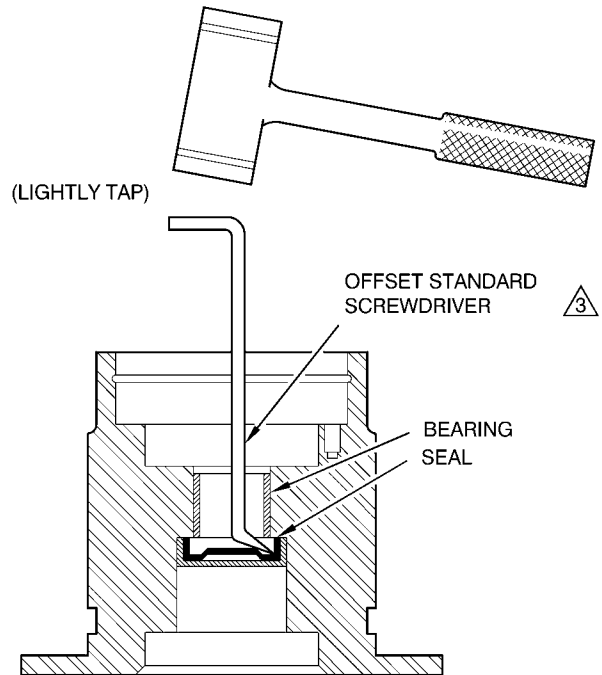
Oil Pump Assembly – Disassembly (Sheet 1 of 2)
